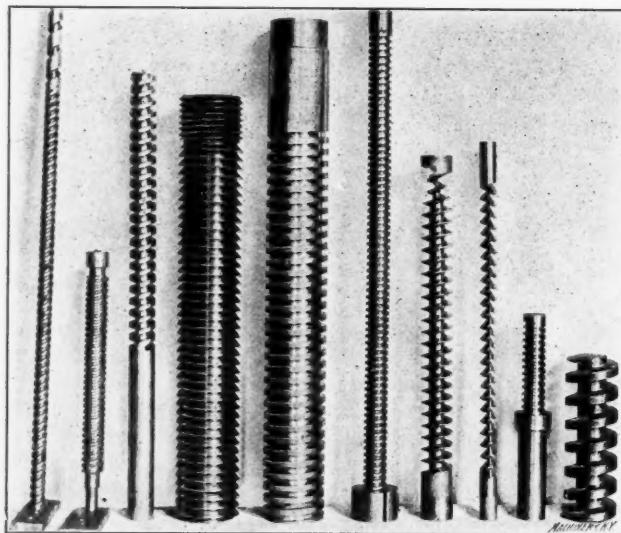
Examples of Screws cut by the Method Developed by the Screw Cutting Co. of America.
